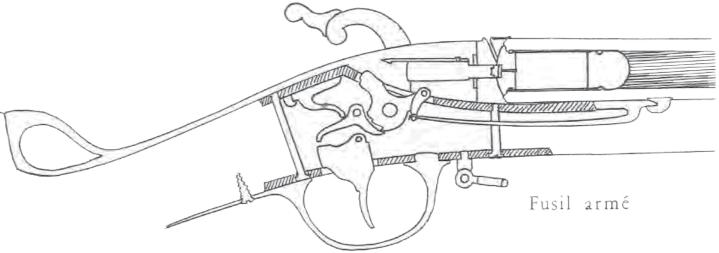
A schematic view of the closed Pauly action cocked, showing how the end of the tumbles, acting as the hammer, will strike the firing pin. (In the drawing, between the end of the firing pin and the cartidge is the ignition channel, not a small pin.) <sup>9</sup>
